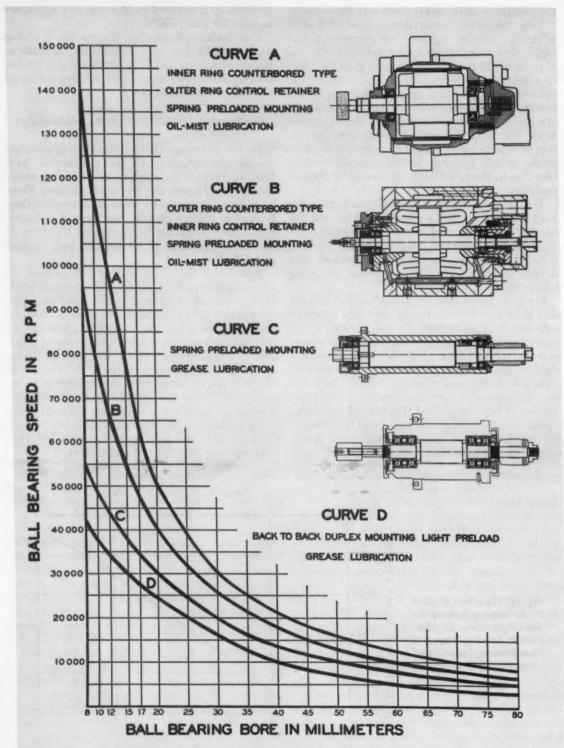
This chart was devised as an aid in determining the type of mounting, method of lubrication, and permissible operating speeds for ball bearings on machine tool spindles.
